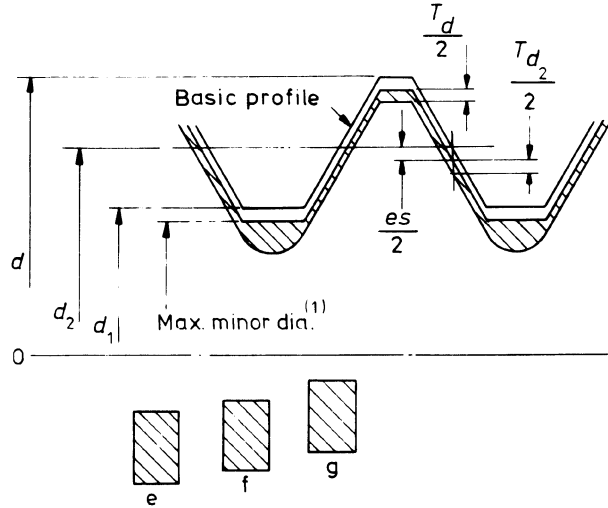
Bolt threads with tolerance positions e, f and g
